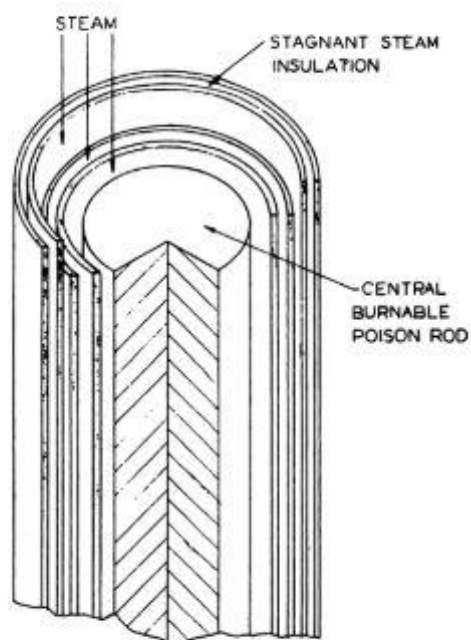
Cutaway section of Pathfinder superheater fuel element.
